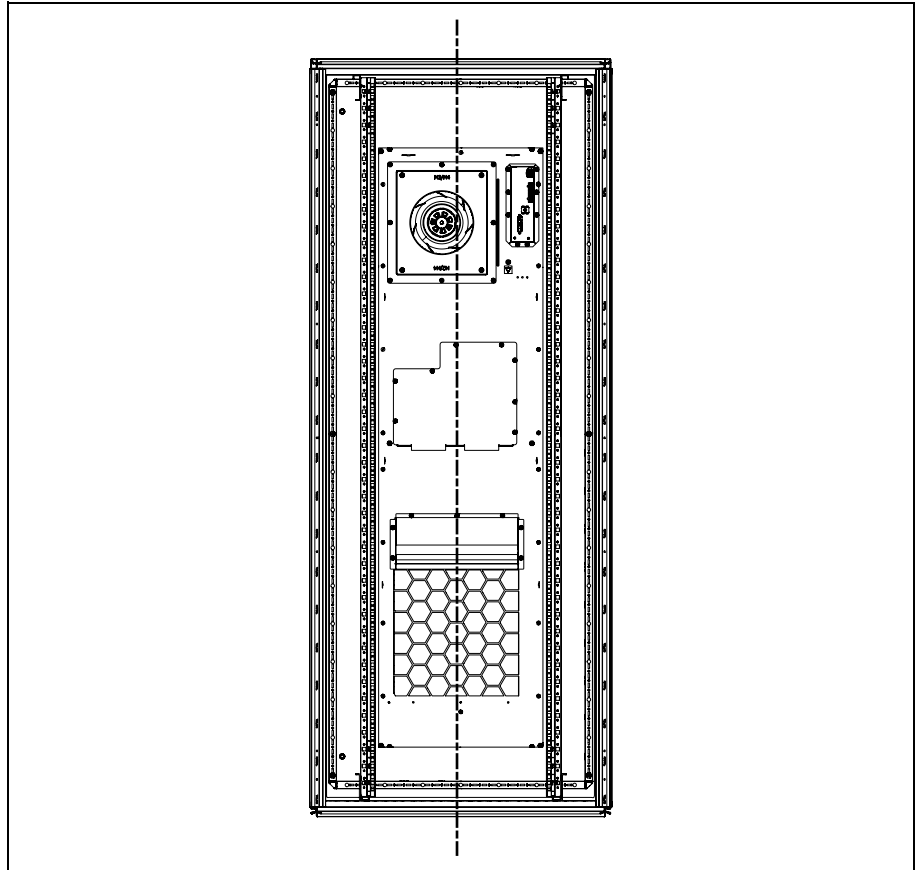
Central installation of the 482.6 mm (19") mounting angles
